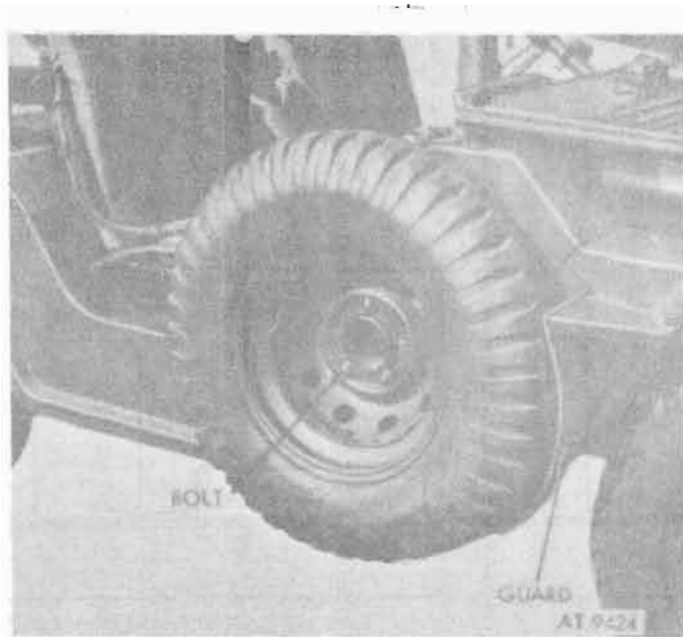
M151A1C and M825 spare wheel support and guard.
